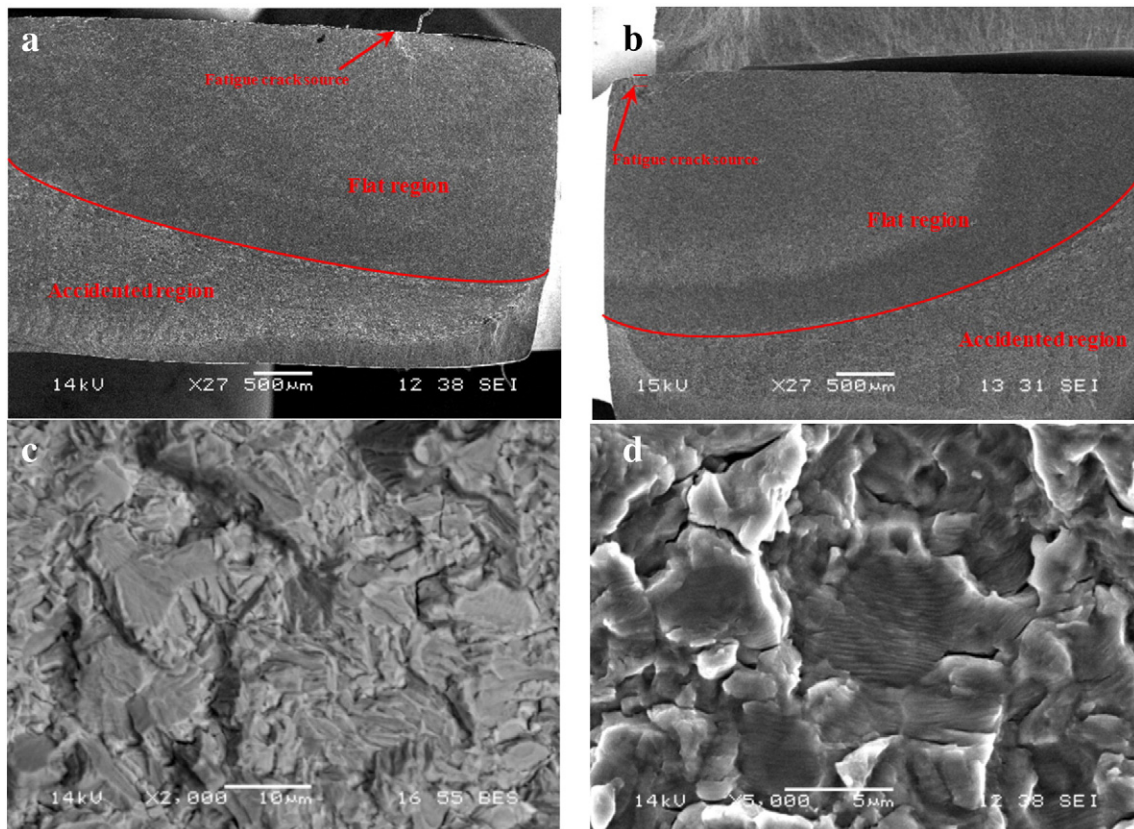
Typical fractography of specimens after fatigue test. (a) Macroscopic fractography without LSP, (b) macroscopic fractography with LSP, (c) enlarged view of the flat region with LSP and (d) enlarged view of the accidented region with LSP.
